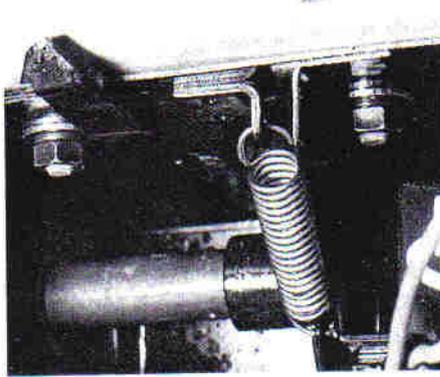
Brake pedal, crosstube and vacuum servo assembly (Sec 18)
